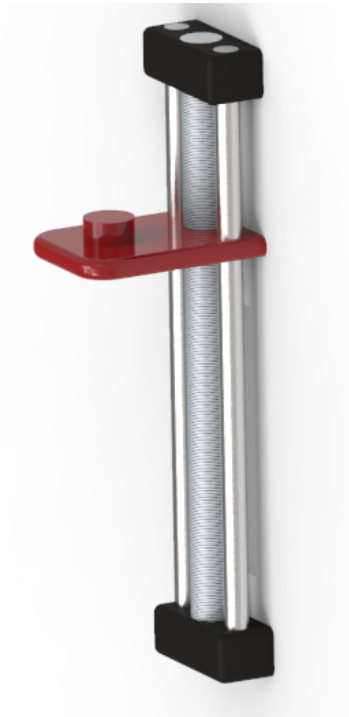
A picture of a linear ball screw actuator. Made in Solid Edge.
